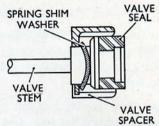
Sectioned view of master cylinder centre valve assembly showing correct location of spring shim washer
